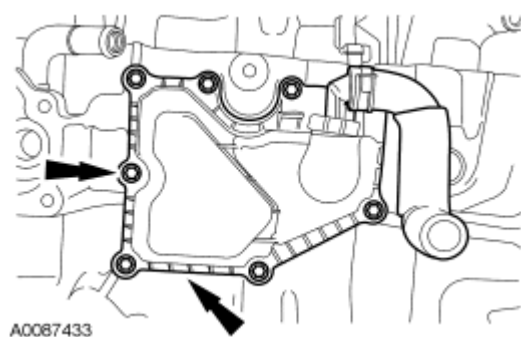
Locating Crankcase Vent Oil Separator And Bolts
